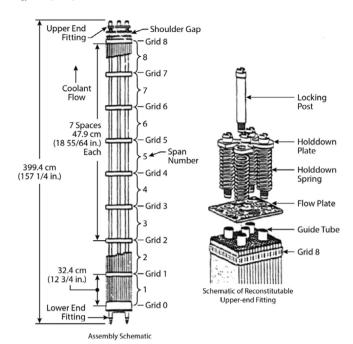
Schematic of Combustion Engineering 14×14 fuel assembly (Ref. Guenther et al., 1991, Fig. 3.1).
